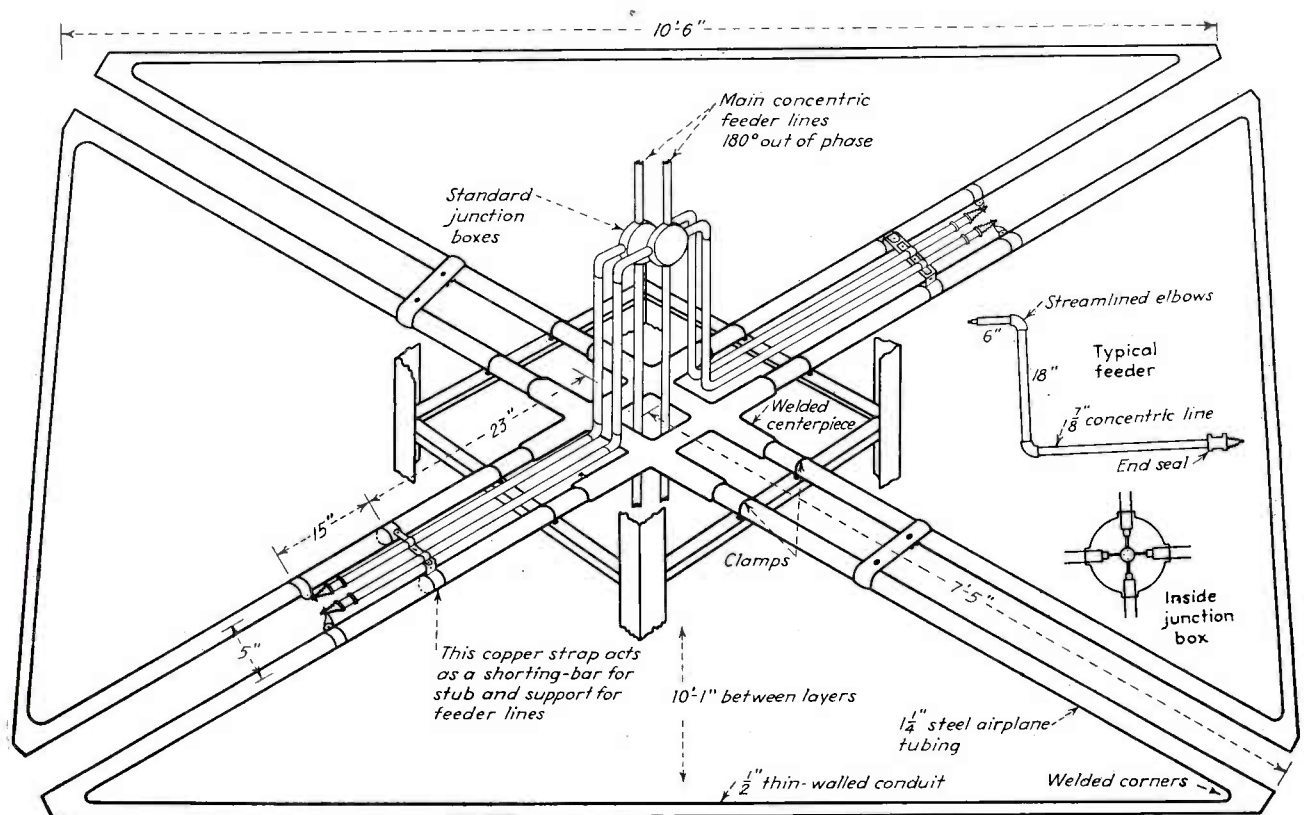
Mounting arrangement at each layer. The diagonals which support the radiating elements, and whose outer ends form the matching stubs, are inserted into a welded center-piece and then clamped to the tower. R-F feeders are shown
